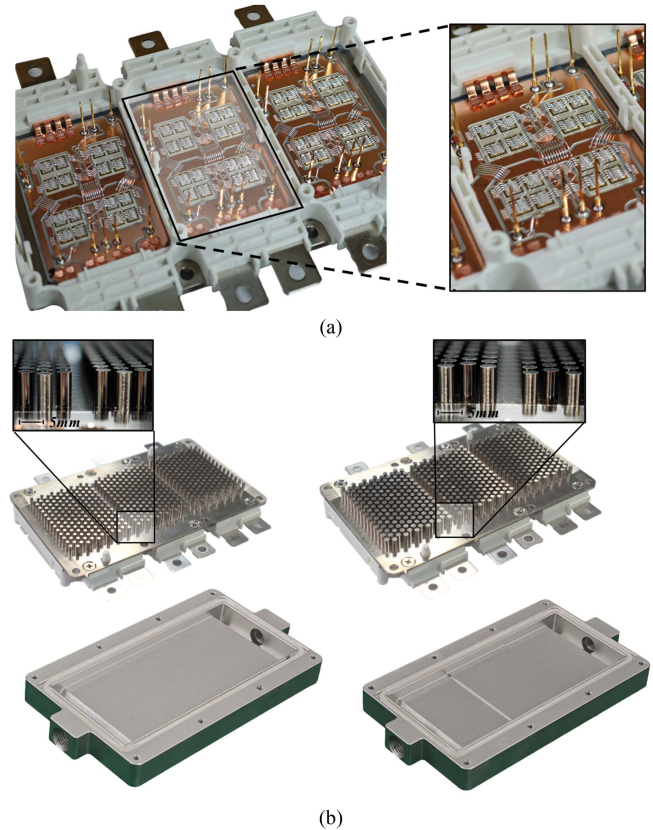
(a) Fabricated power module. (b) Traditional Pin-Fin cooling configuration (left) and optimized Pin-Fin cooling configuration (right).
